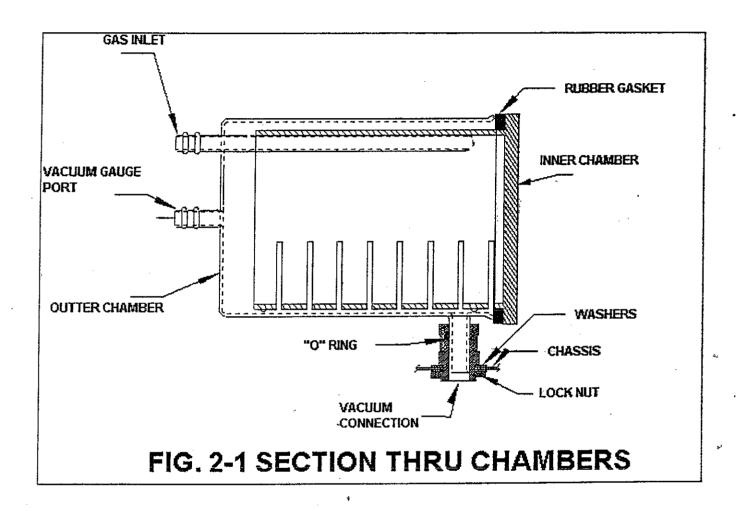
Connecting Outer Chamber to Vacuum Manifold
